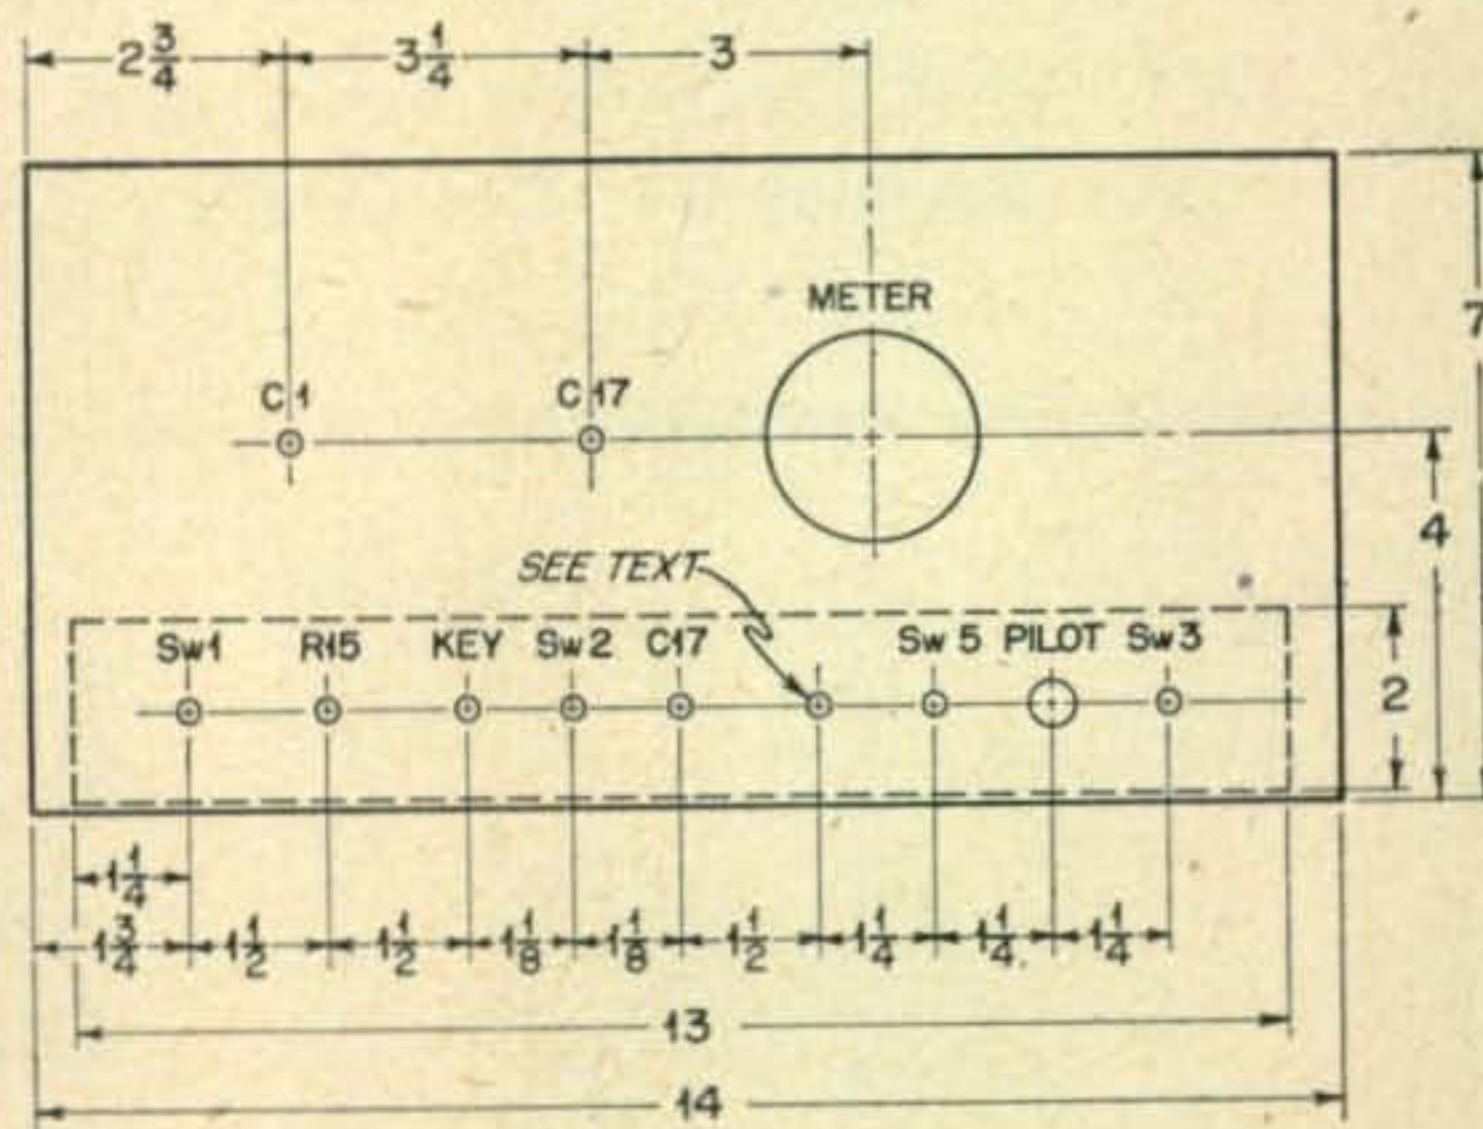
Drilling template for panel and front of chassis of the "Complete 25-er." Exact positions of controls and diameters of the holes will depend on components used.
